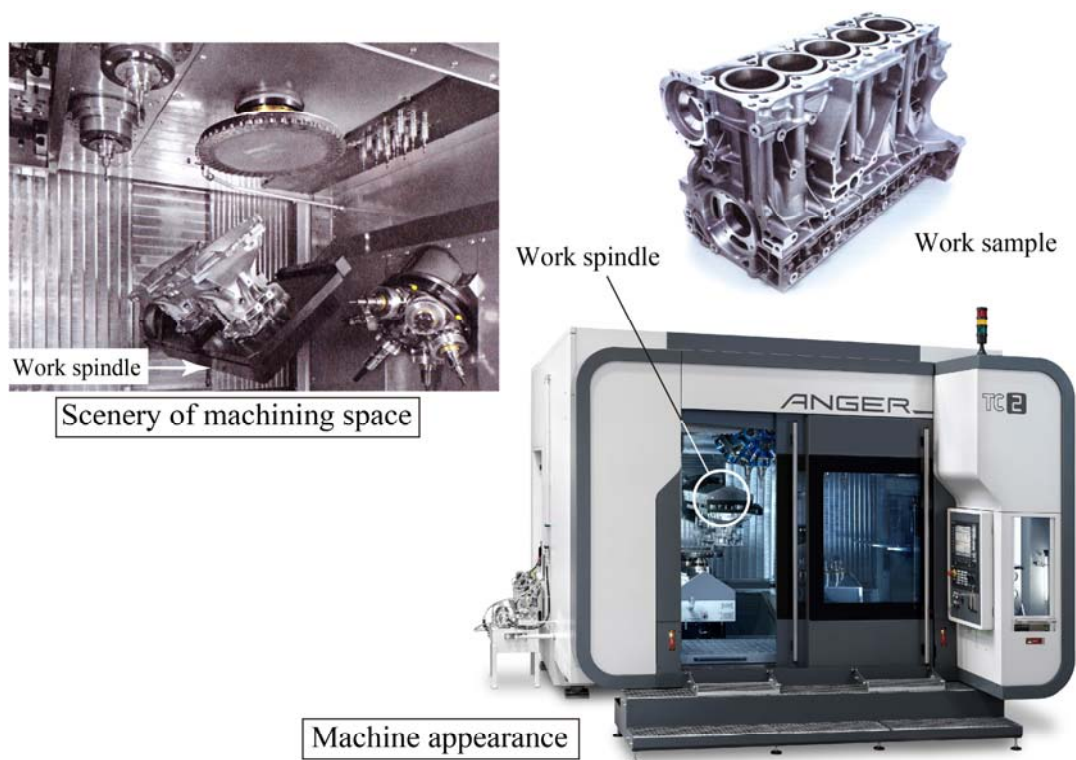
Transfer center and its machining space (by courtesy of ANGER)
